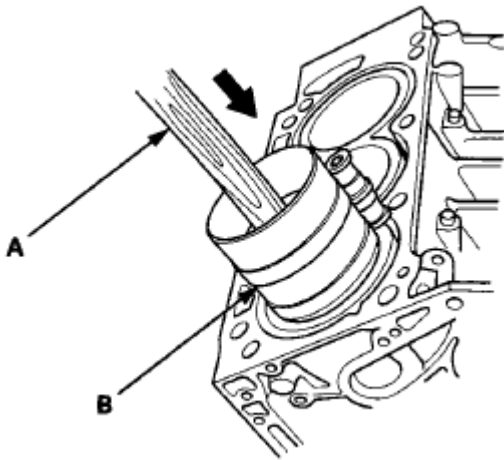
Positioning Piston/Connecting Rod Assembly In Cylinder
